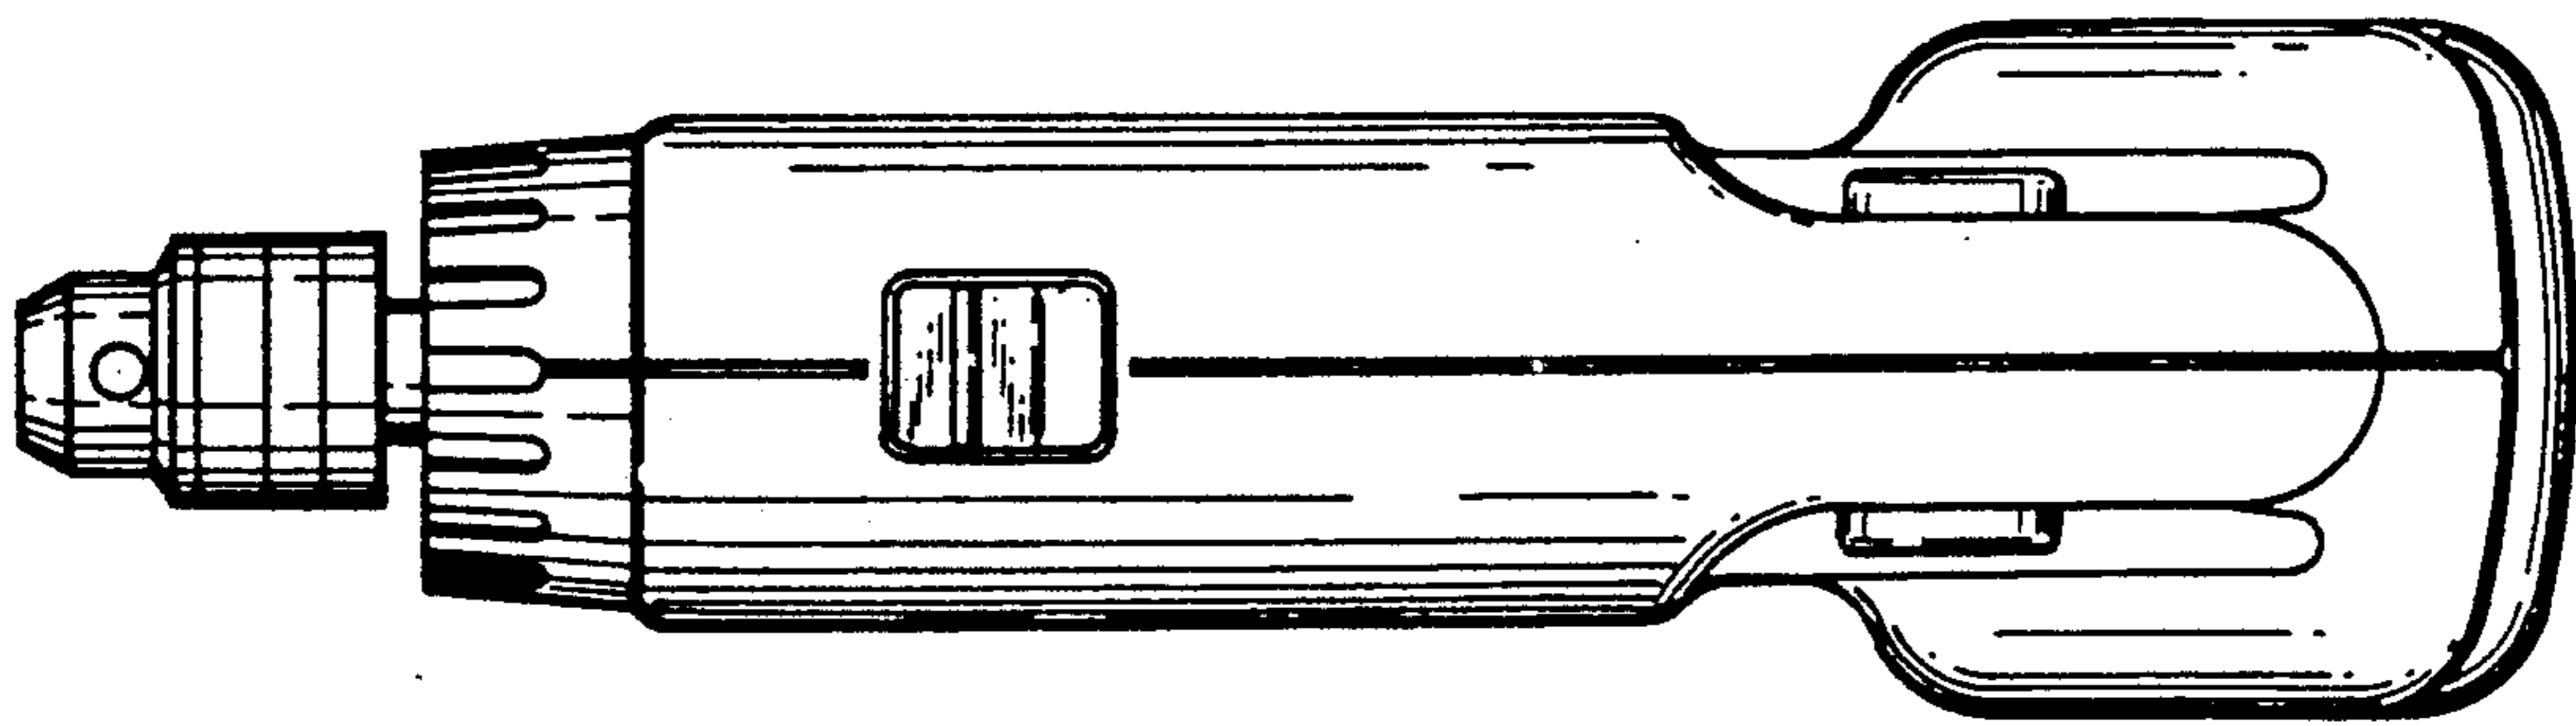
is a right side elevational view of a portable electric drill showing my new design, the left side being a mirror image;
